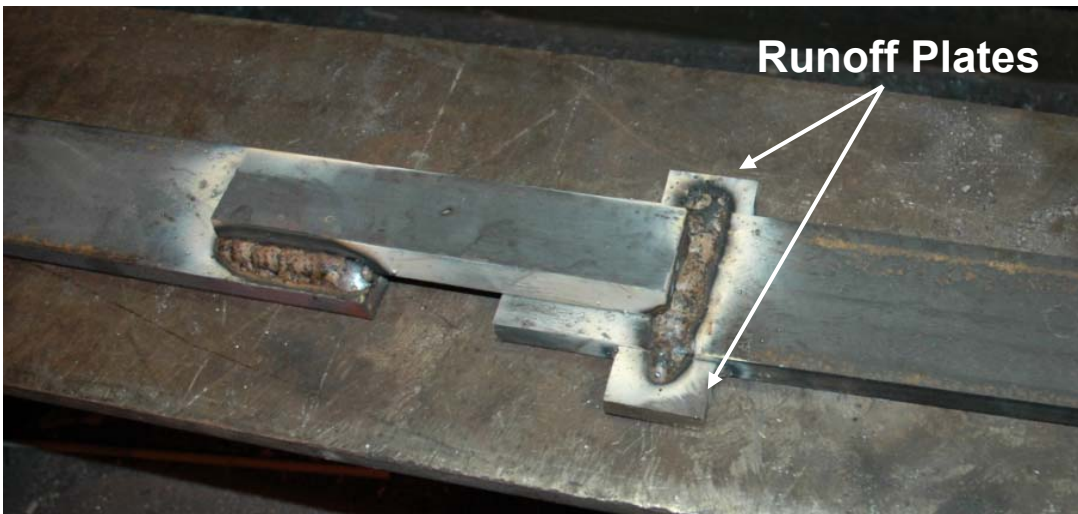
Photograph of the test specimen with the runoff plates used during the welding process
